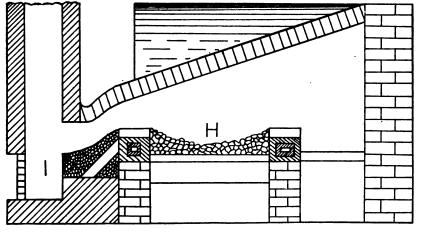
SECTIONAL VIEW OF REVERBERATORY FURNACE
